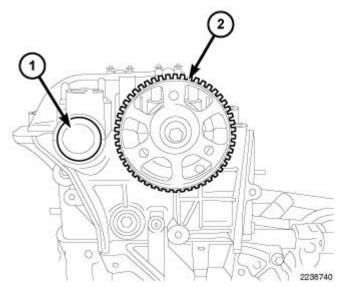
Camshaft Sprocket Courtesy of CHRYSLER LLC
